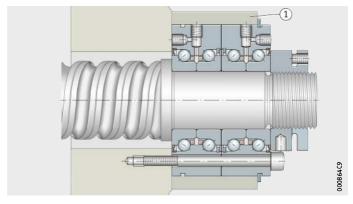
Matched pair, outer ring screw mounted in bore, preloaded by locknut AM
